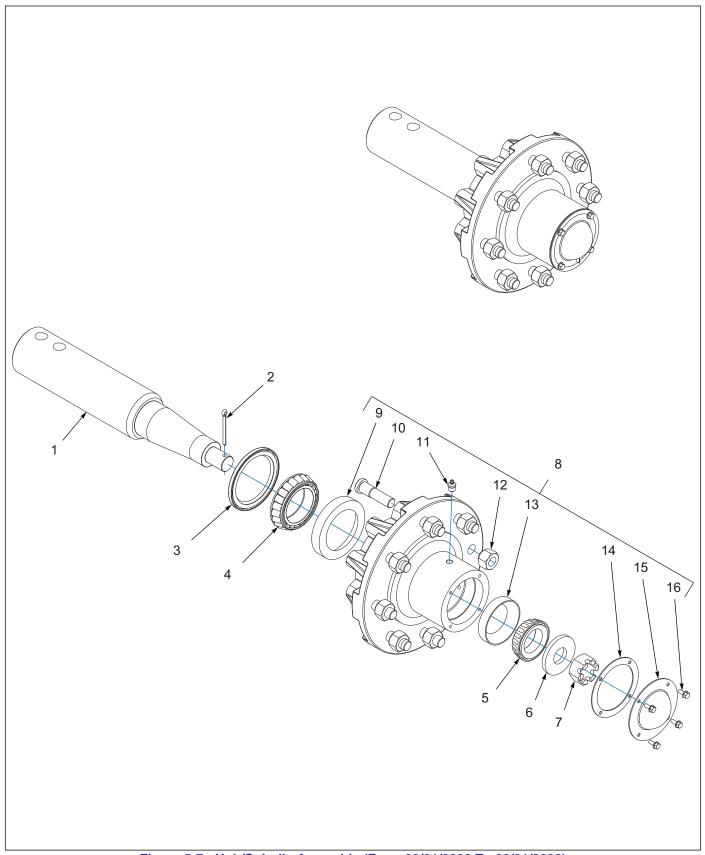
Hub/Spindle Assembly (From 02/01/2020 To 06/01/2022)
